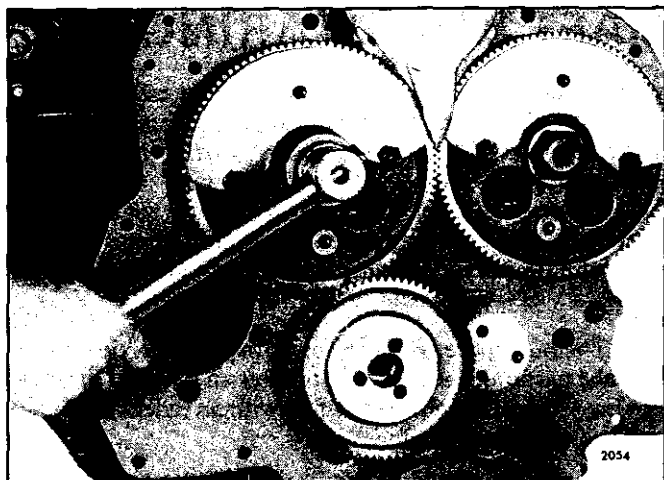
Removing or Installing Nut on Camshaft or Balance Shaft
